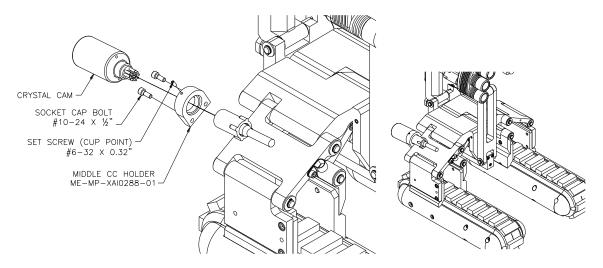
AUX CAMERA INSTALLATION - POSITION #1
